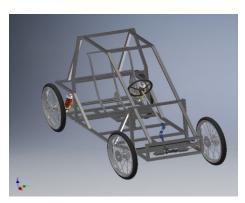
Perspective view of the CAD design of the chassis and mechanical components.
